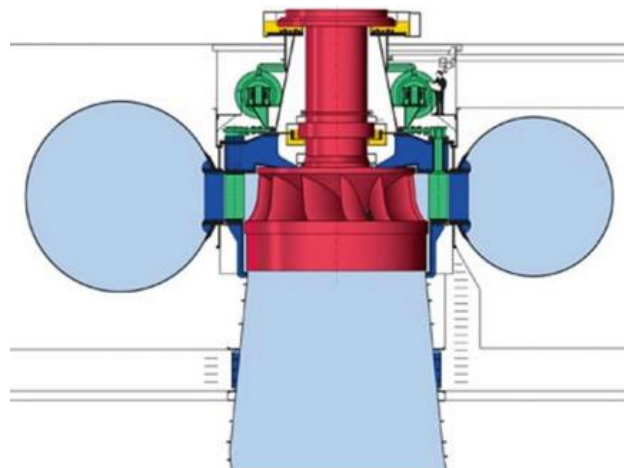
Cross-section of a low head Francis turbine with scroll case, wicket gates and draft tube [28]
